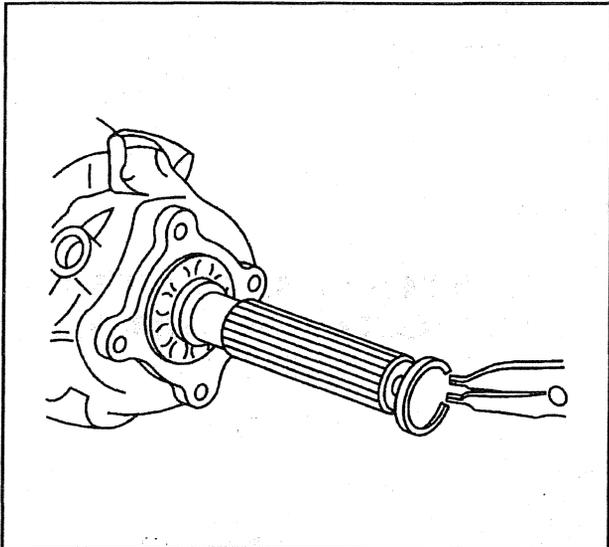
NP 241 Transfer Case Rear Bearing Snap Ring
